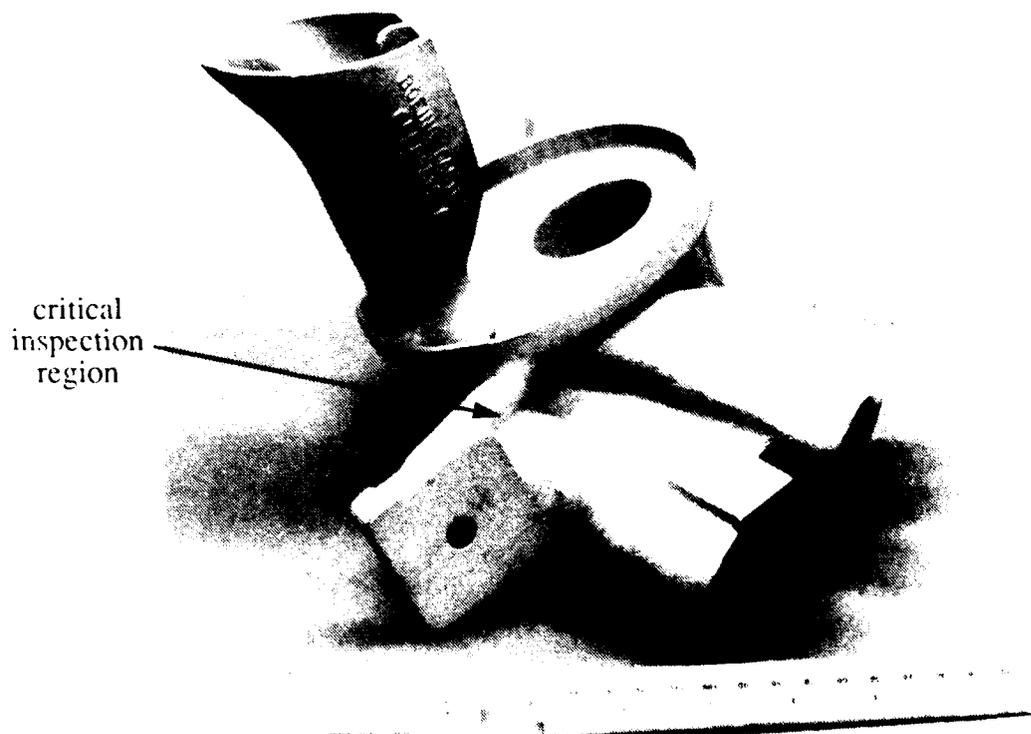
Photograph of an hydraulic manifold casting.
